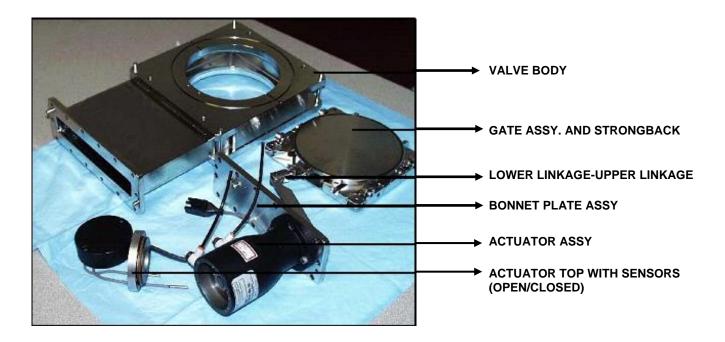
BONNET ACTUATOR CARRIGE ASSY. SEPARATED FROM VALVE BODY
